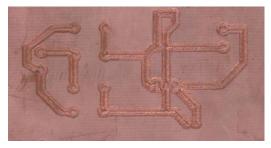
Circuit Board half-depth milled using single-sided copper-clad laminate.
